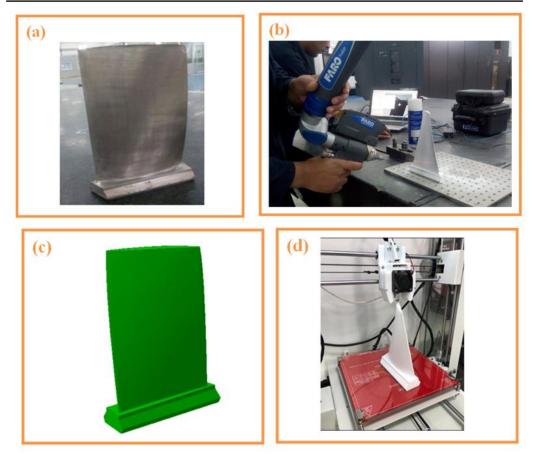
The manufacturing process: (a) gas turbine blade (b) FARO scanner (c) reproduces the geometric shape on CATIA V5 (d) 3D printing.
